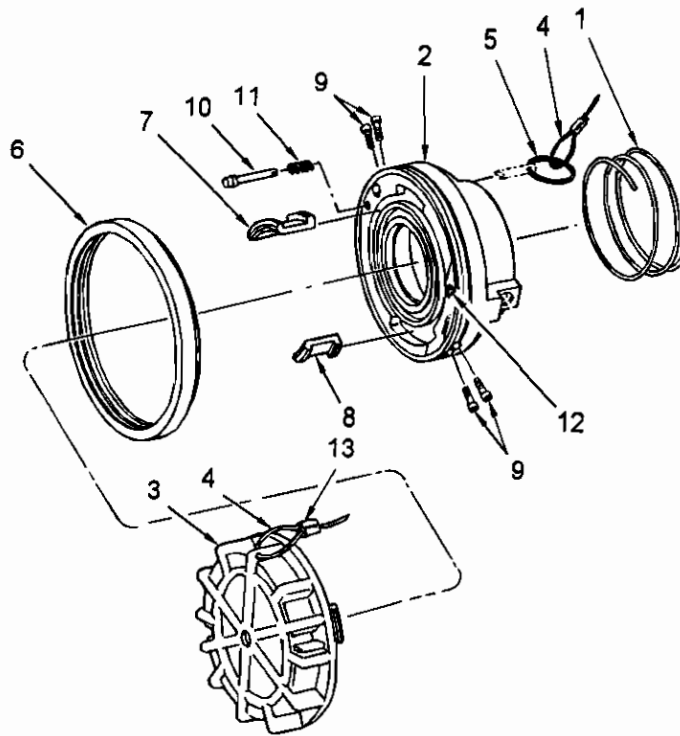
Repair of Two Inch Non-Valved Unisex Coupling
